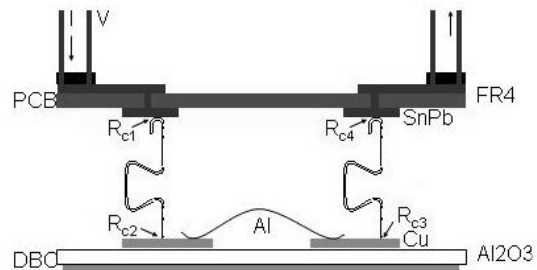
Schematic overview of the spring pin contact system. PCB connected to DBC by spring pins.
